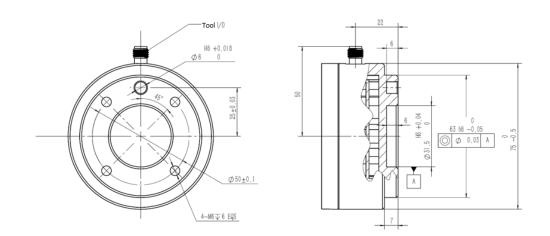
Mechanical dimensions of end-effector flange, unit: mm.
